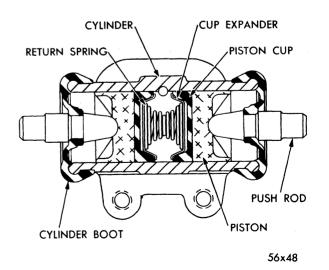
Wheel Cylinder (Rear) (Sectional View)
